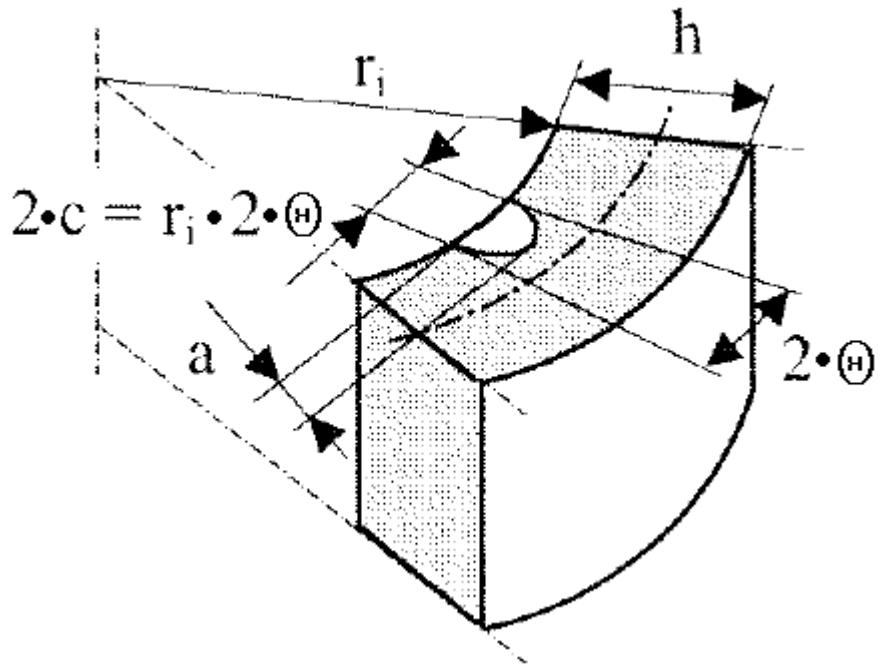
Layout of a crack in a diametral plane of a cylinder;
